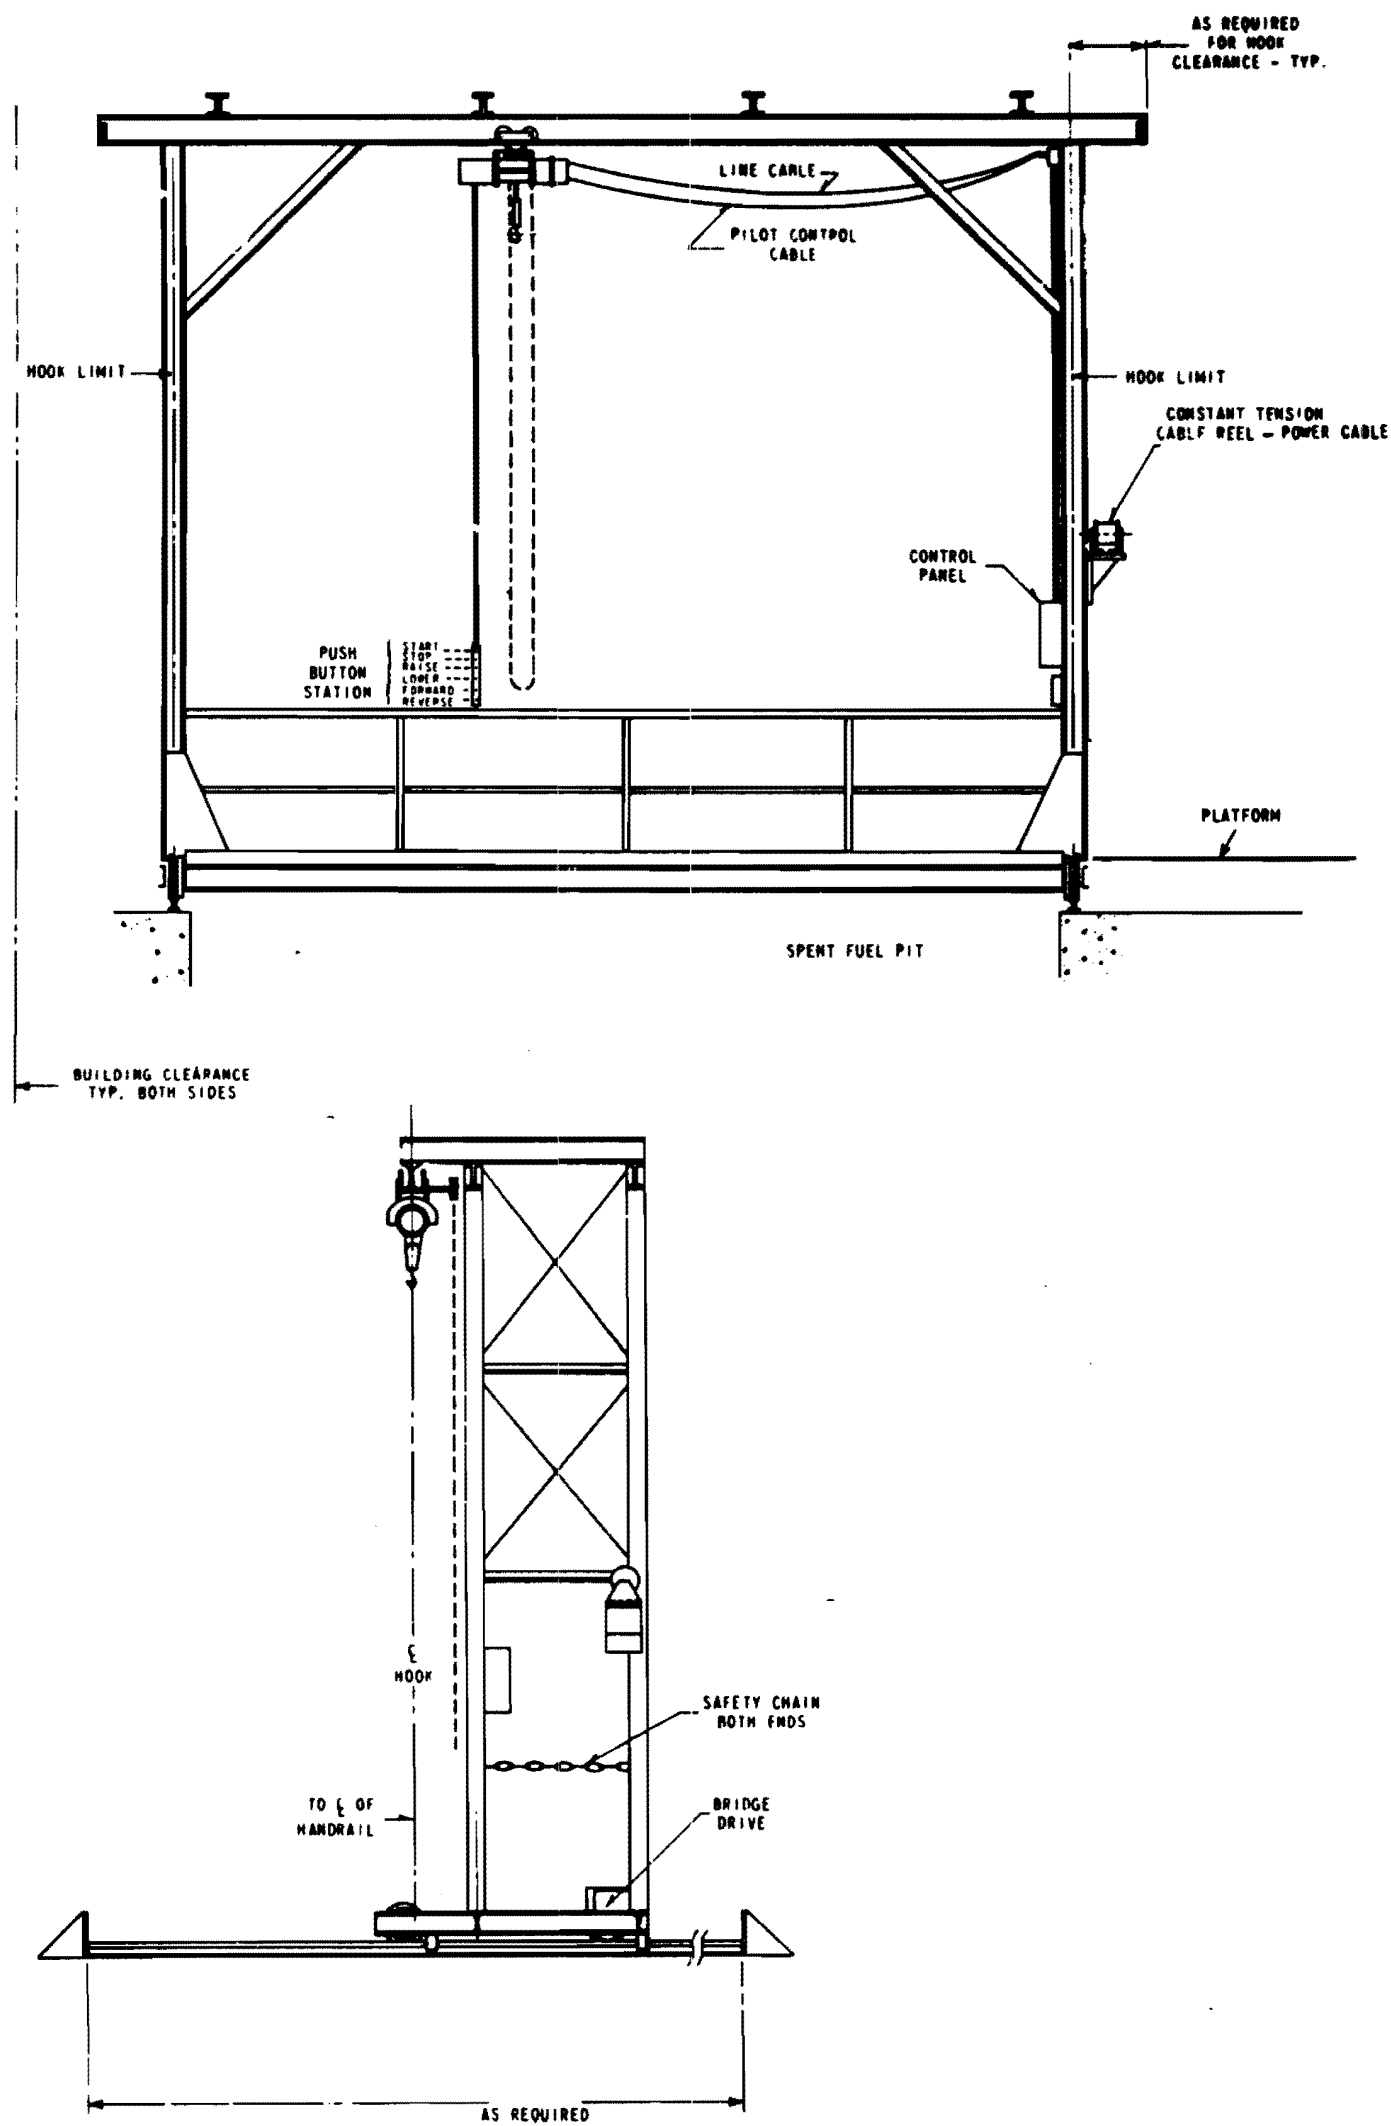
Typical Spent Fuel Pit Bridge
